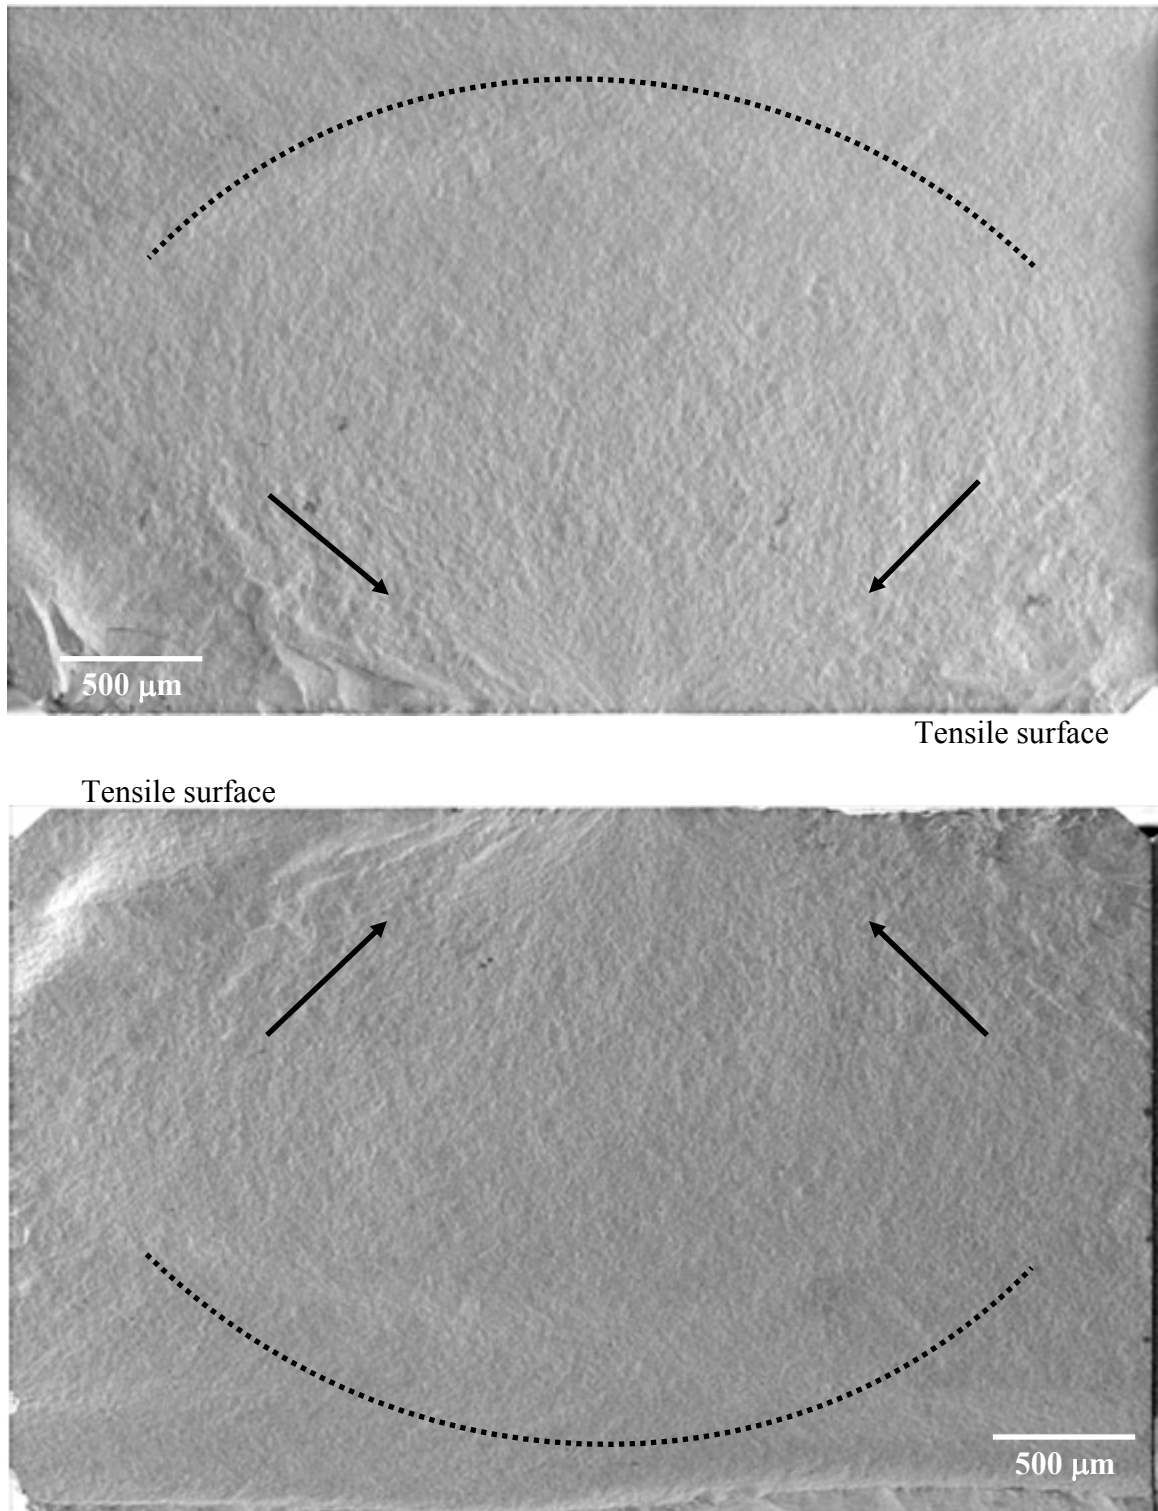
Bar B. Primary fracture surface, left and right faces, of a low strength flexure bar ($\sigma_f = 238$ MPa). Fracture appears to have initiated near the center of the bend bar. Composite images. 200x magnification
